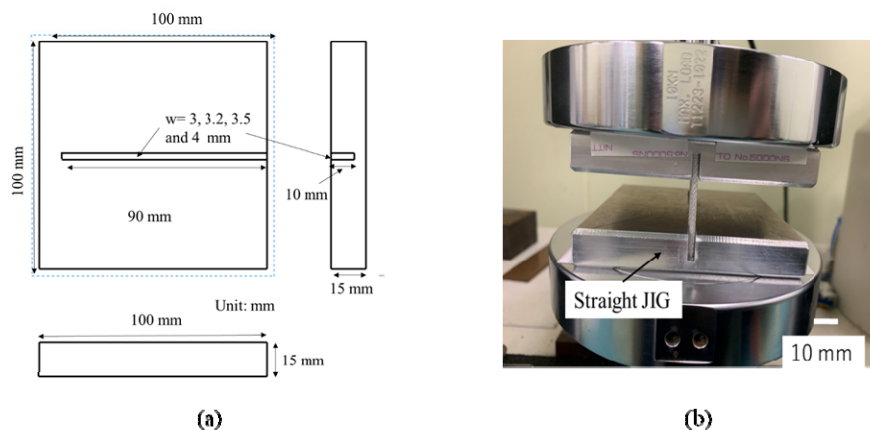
Experimental apparatus of in-plane compressive test of a straight panel of GFSS. (a) A half of edge holder of straight panel of GFSS, (b) Setup of straight panel on upper/lower edge holders.
